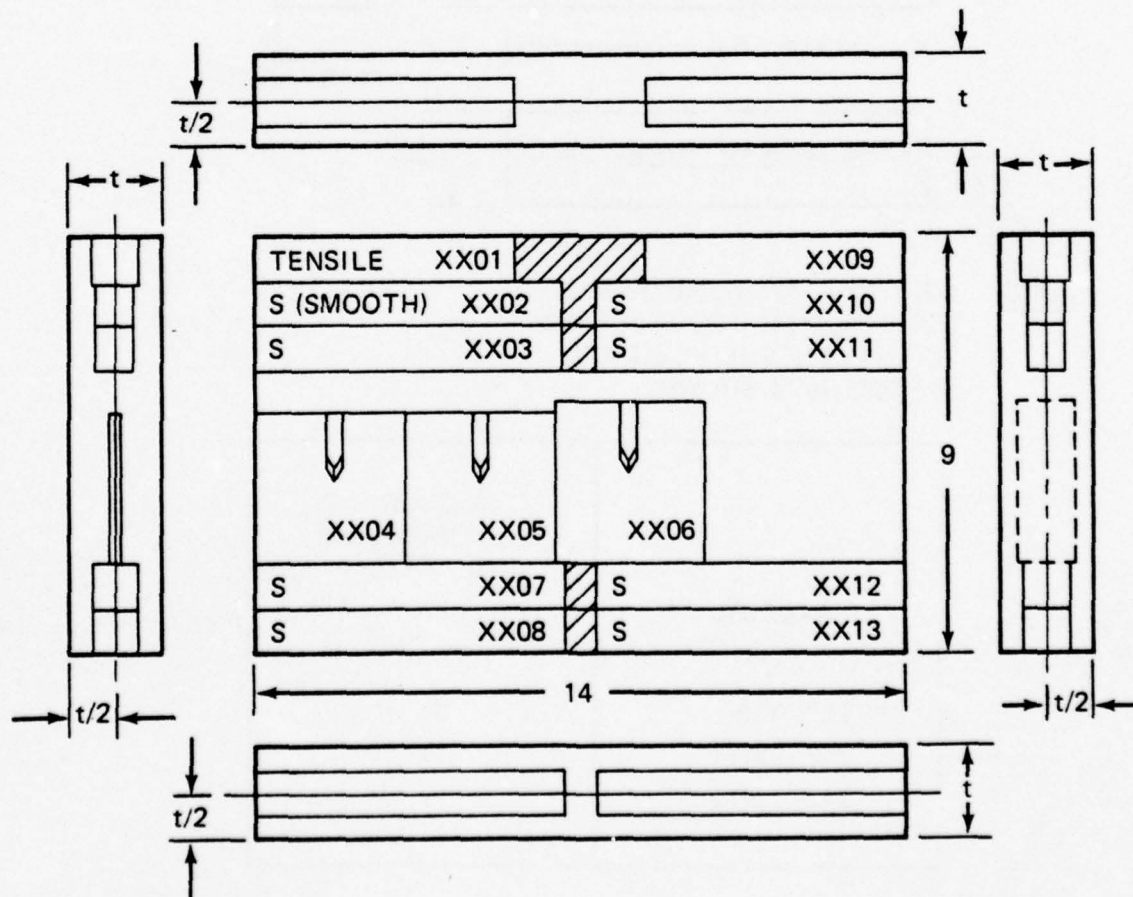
6.7-Inch-Thick Forging for Specimens XX01 Through XX13.
